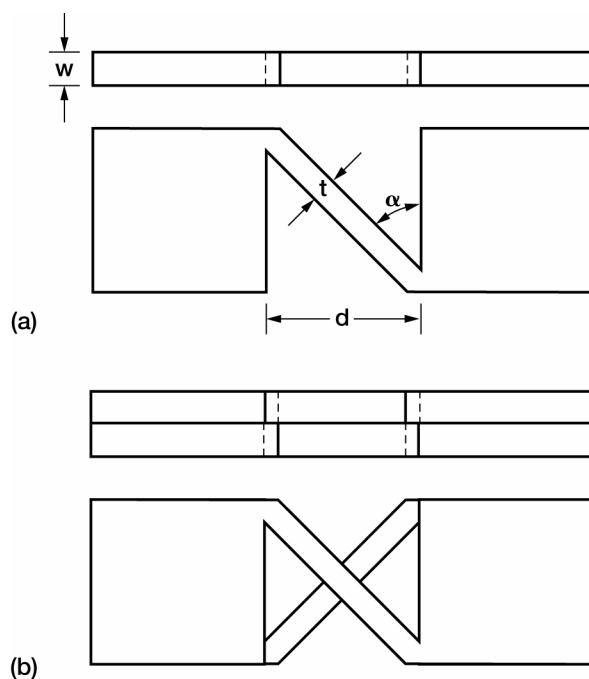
(a) Half of X-type flexure. (b) Assembled X-type flexure.
